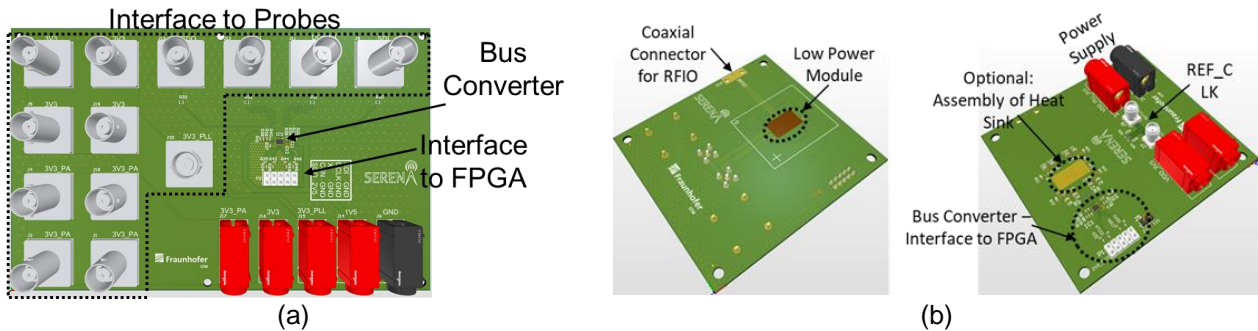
Test boards for low-power module (a) Interface board (b) RF test board
